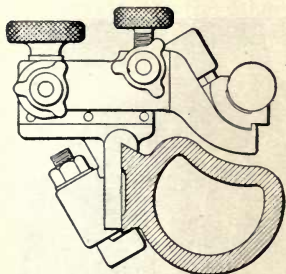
Open-type Norton steady-rest for camshaft grinding.
